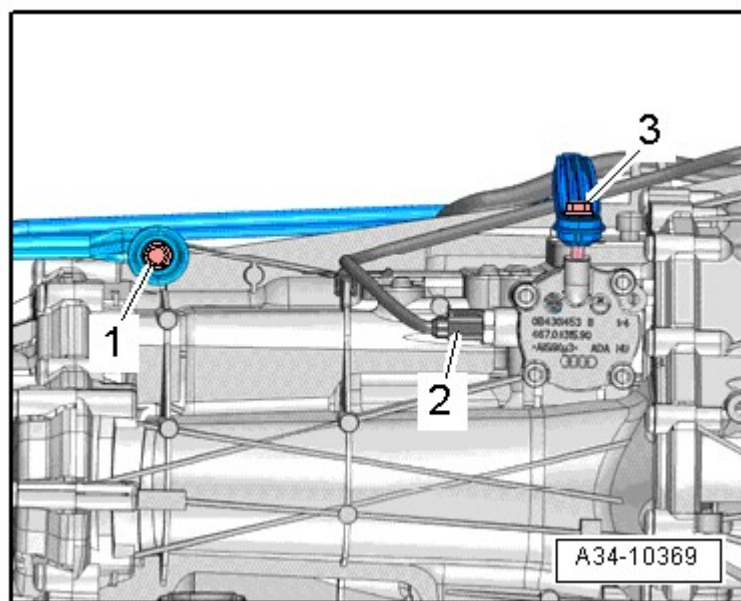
Identifying Bolts, Selector Rod And Push Rod
